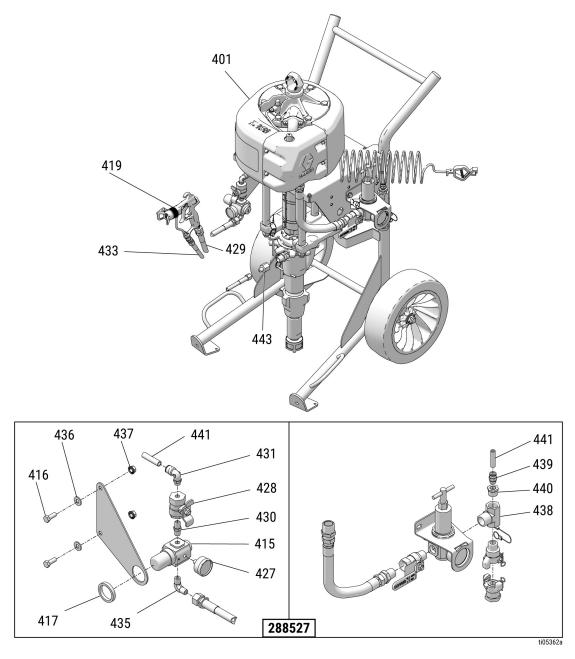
Air Assisted Sprayer Packages Parts Diagram
